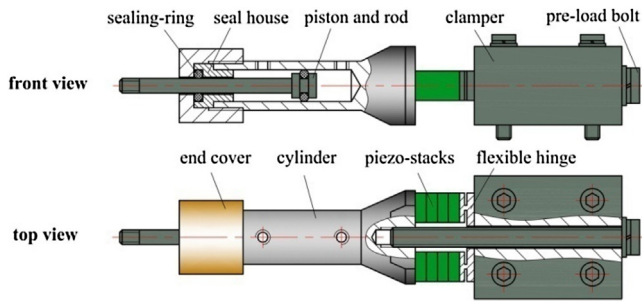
Schematic of the pneumatic actuator prototype (front view and top view).
